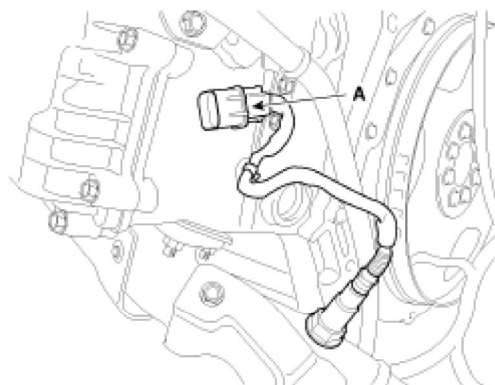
Identifying Oxygen Sensor Connector Bracket
